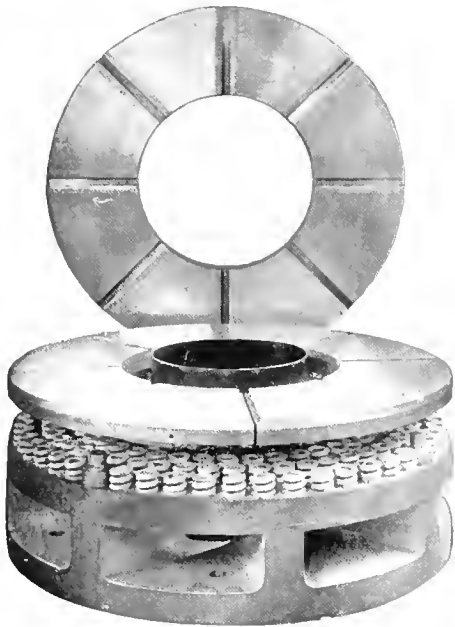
Spring Thrust Bearing with Babbitted Stationary Ring Raised to Show Springs and Dowel Pins
